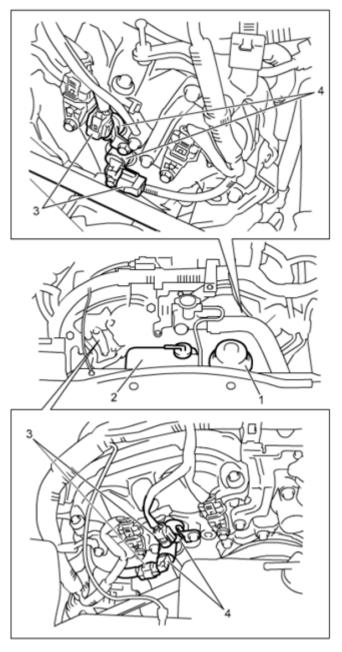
Identifying Engine Block Heater Terminal Courtesy of SUZUKI OF AMERICA CORP.
